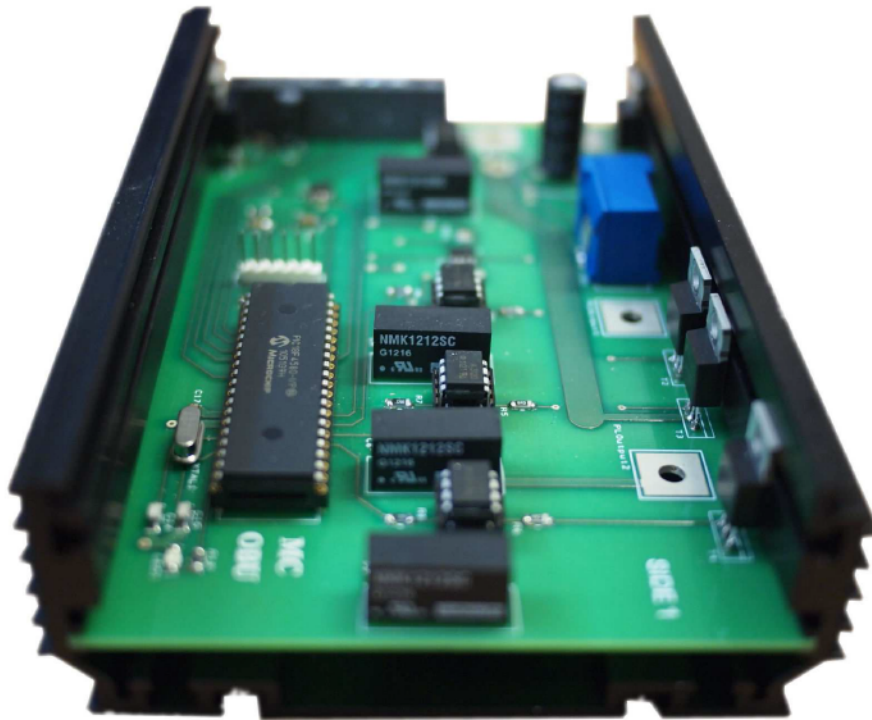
The assembled steering control board, fitted into the protective box
